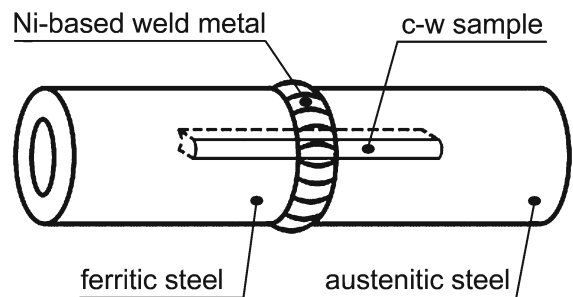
Schematic cross-weld (c-w) sampling.
